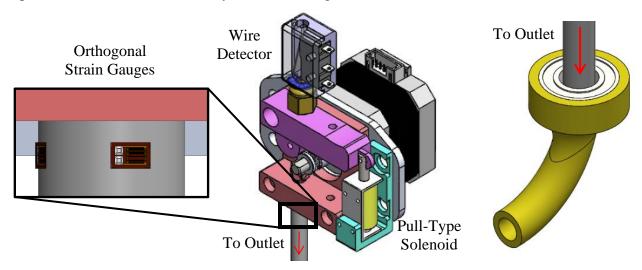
Detailed view of extruder assembly. *Left*: close-up of strain gauges showing orthogonal placement on left and front sides. *Right*: curved wire guide with bearing mount.
